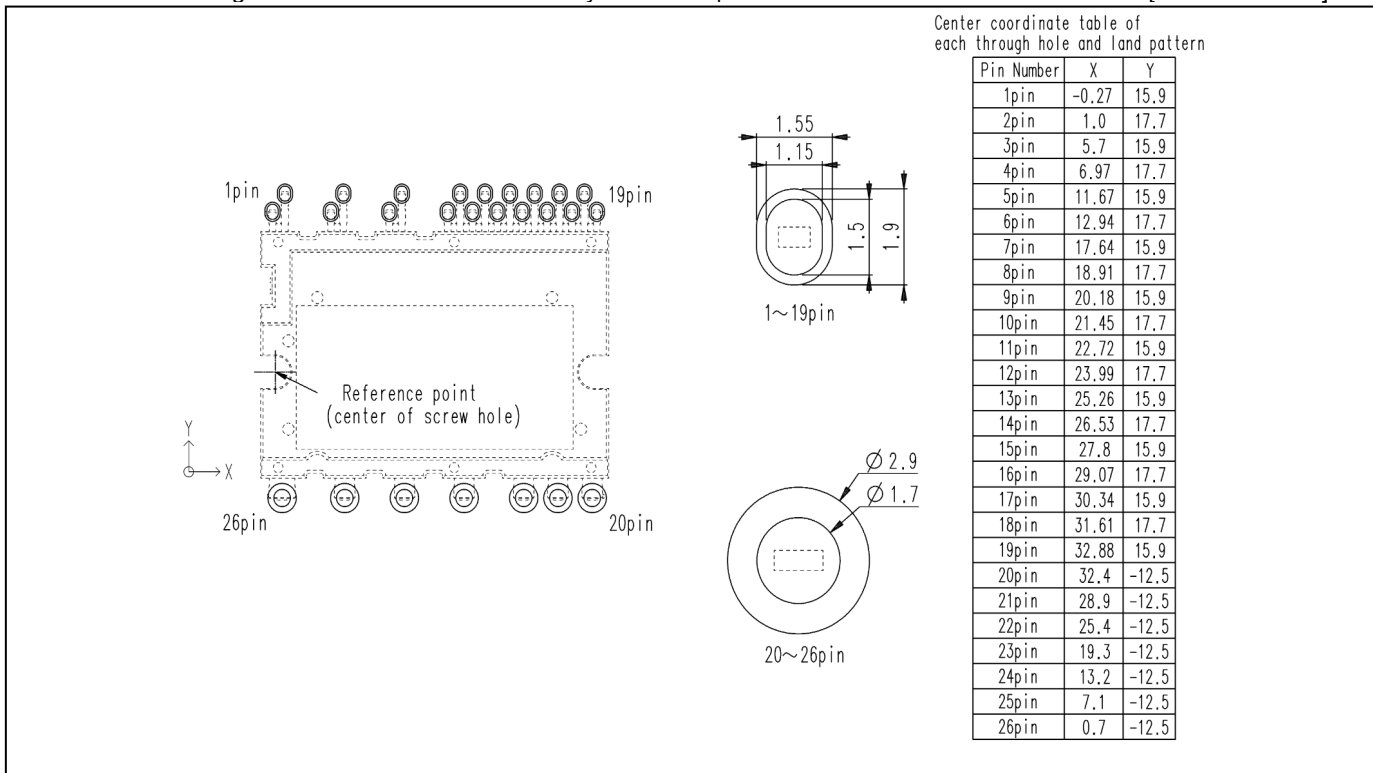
(Reference Figure) PCB Through-hole Pattern
